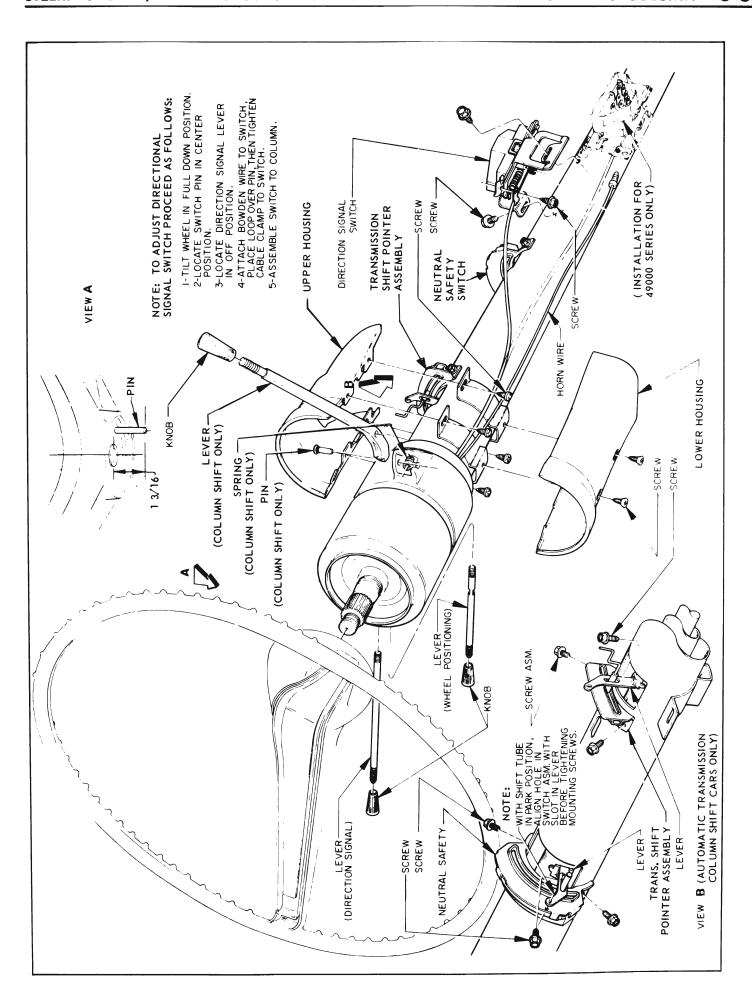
Automatic Transmission Tilt Steering Column - 45000, 46000, 48000 & 49000 Series
